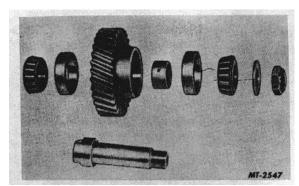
Exploded View Of Idler Gear Components (Model RA-341 Shown).
